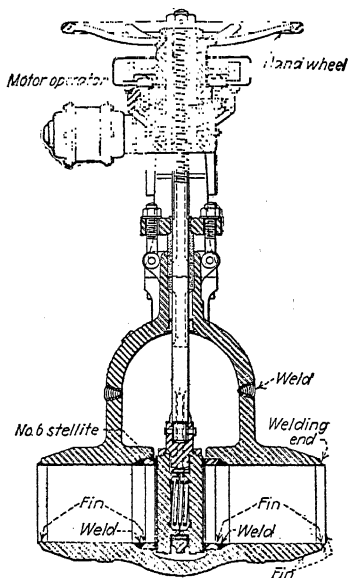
Parallel-slide gate valve showing welded construction.
